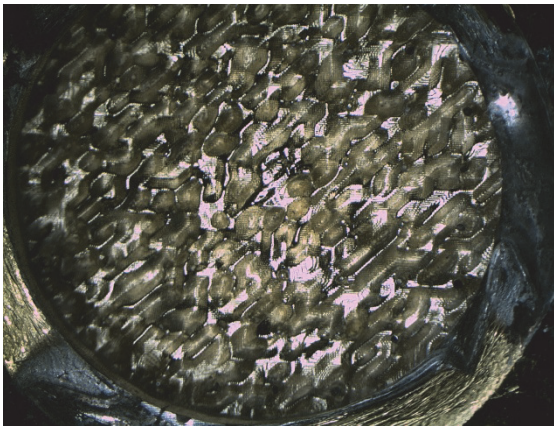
Microscopic view of the mold insert used for replication by injection molding
